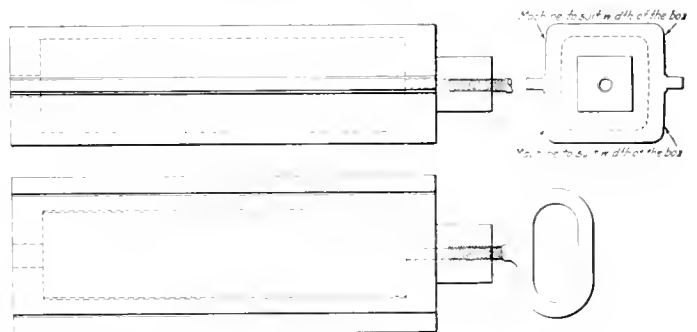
Cast Iron Forms for Pouring Shoe and Wedge Liners.
